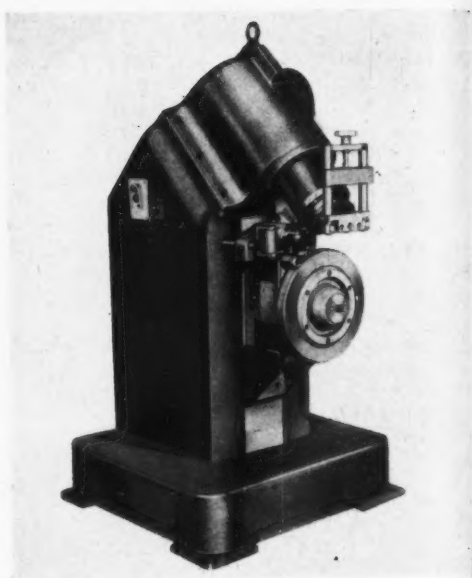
Pullmax type X8 beveling machine for preparing the edges of steel plates and tubes for welding
